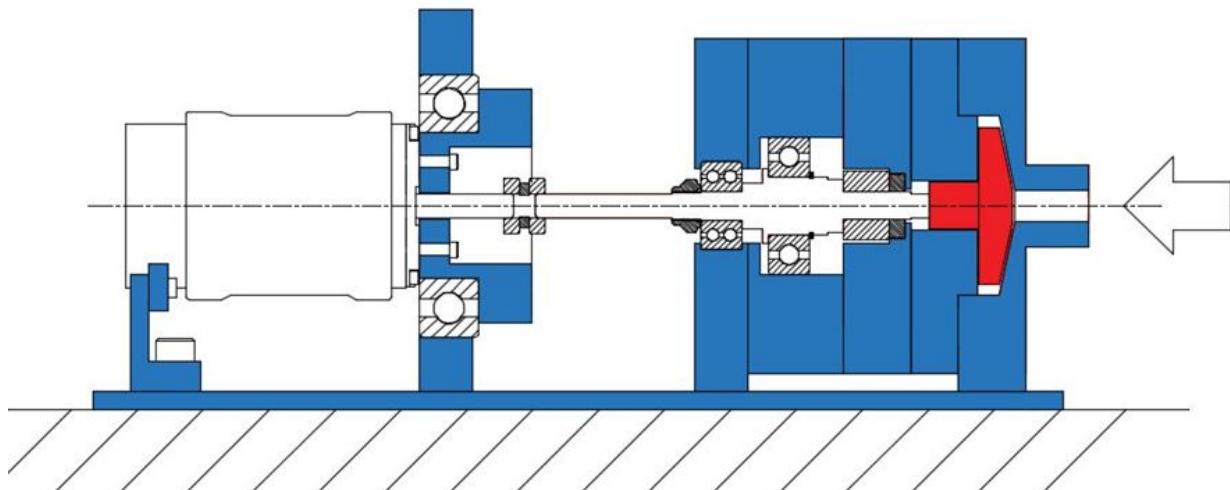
Section schematic, in-house fabricated components shown in blue (shaft also fabricated in-house), 3D printed impeller shown in red. Other components purchased of the shelf not feasible for in-house production.
